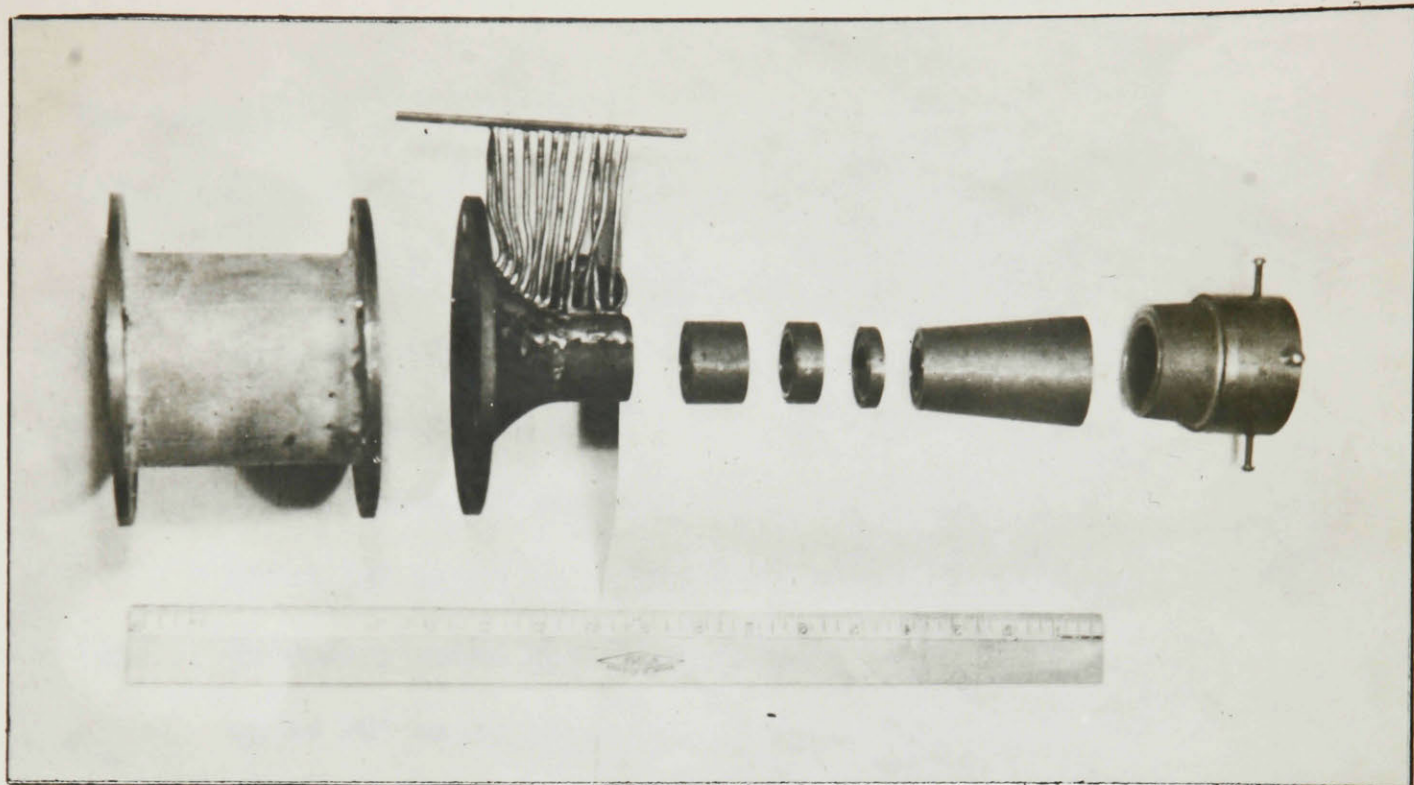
VIEW OF NOZZLE ASSEMBLY
